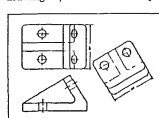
RIGHT AUXILIARY VIEW PROJECTED FROM THE FRONT VIEW
